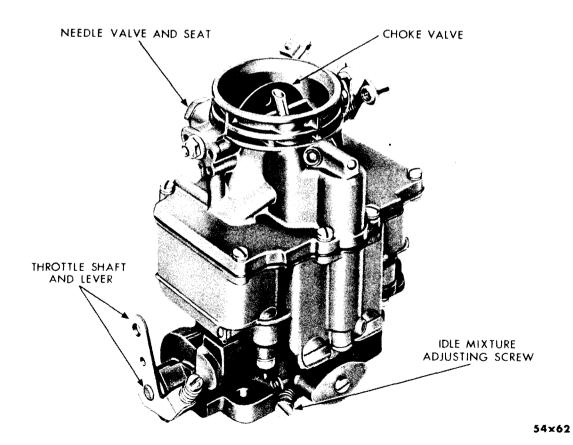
Stromberg Carburetor (Model AAVP-2)
